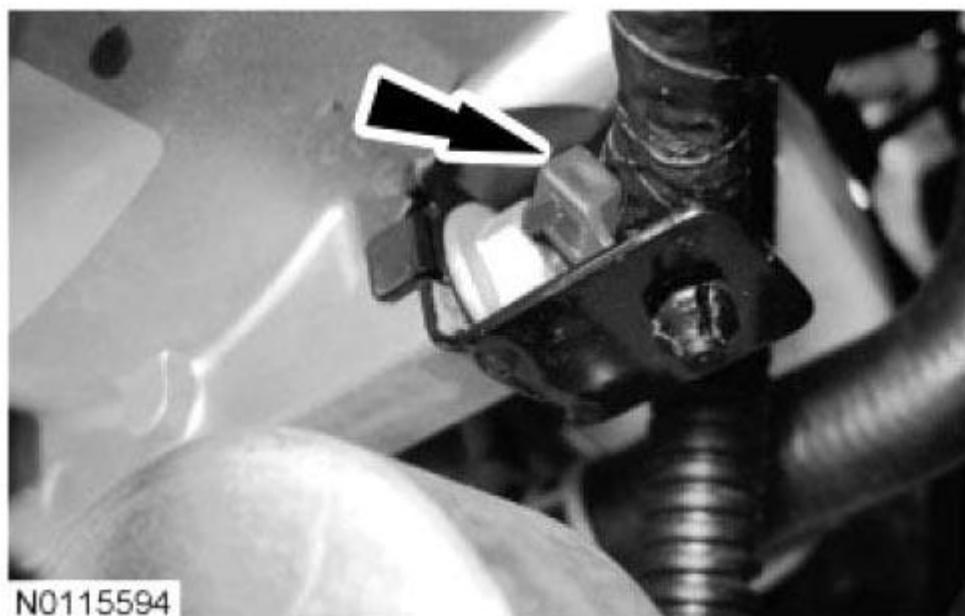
Locating Wiring Harness Retainer To Lower A/C Compressor Bracket
